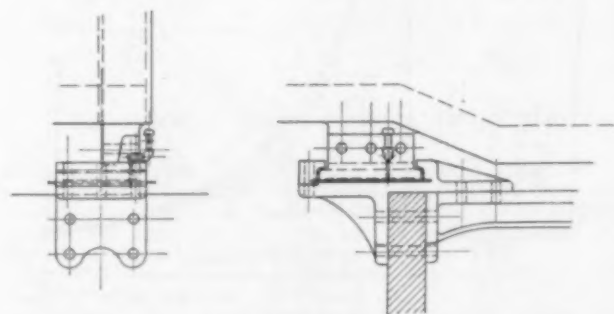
Front Connection Between Frame and Firebox, Design F-11
